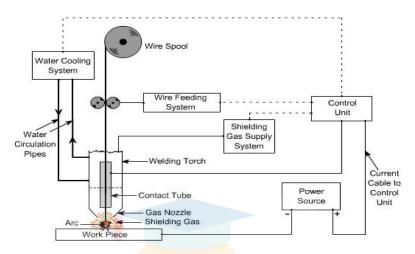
Schematic Diagram of MIG Welding
